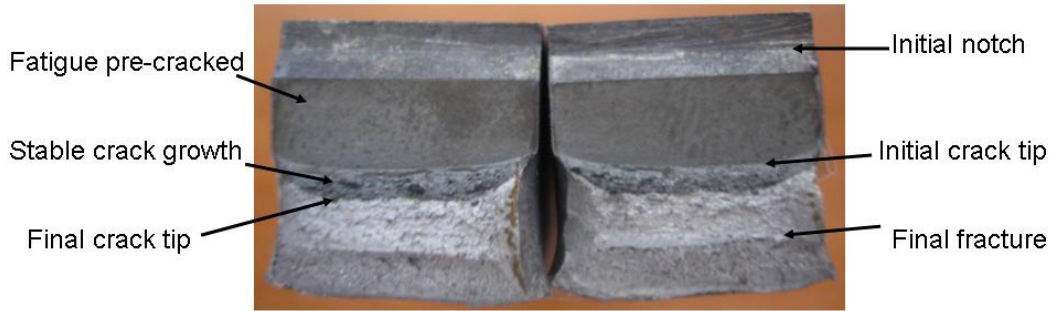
Fracture surfaces of SENB specimen with a pre-crack in HAZ.
